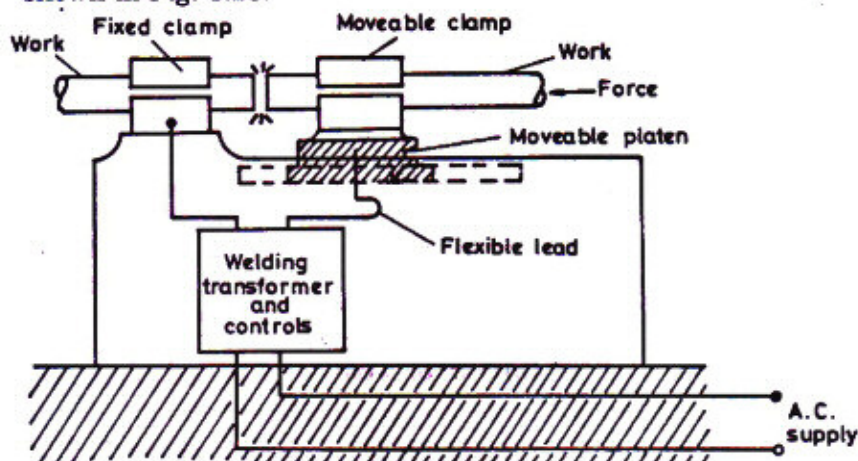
Basic elements of a set-up for flash butt welding.
